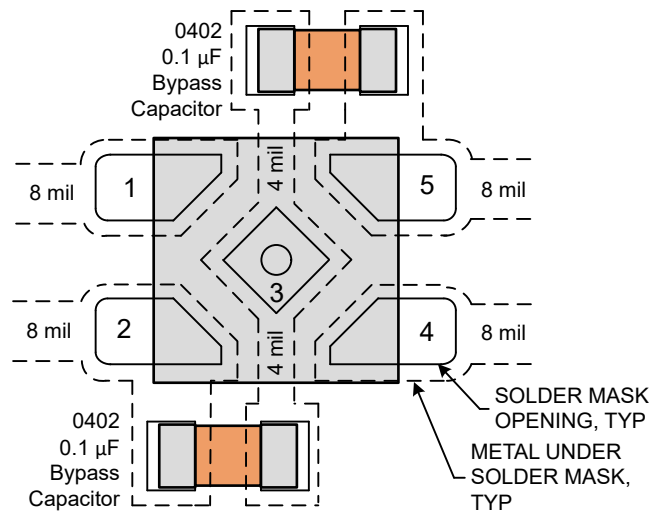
Example Layout for the DPW (X2SON-5) Package
